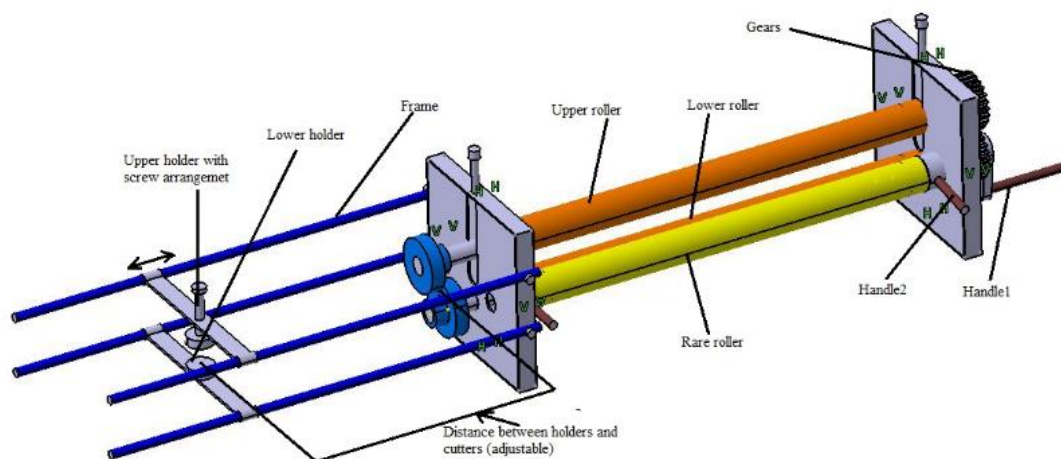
Initial Conceptual CAD design for surface bending tool
